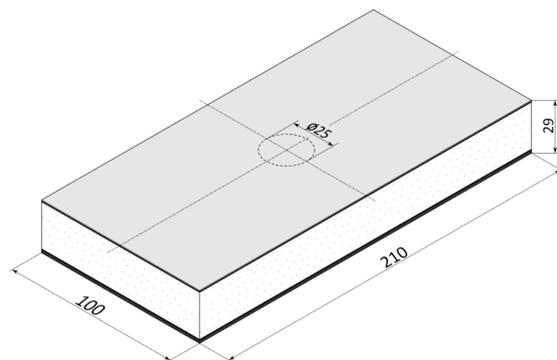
Sketch of a test specimen with a circular delamination (\varnothing 25 mm) of the aluminum layer.
